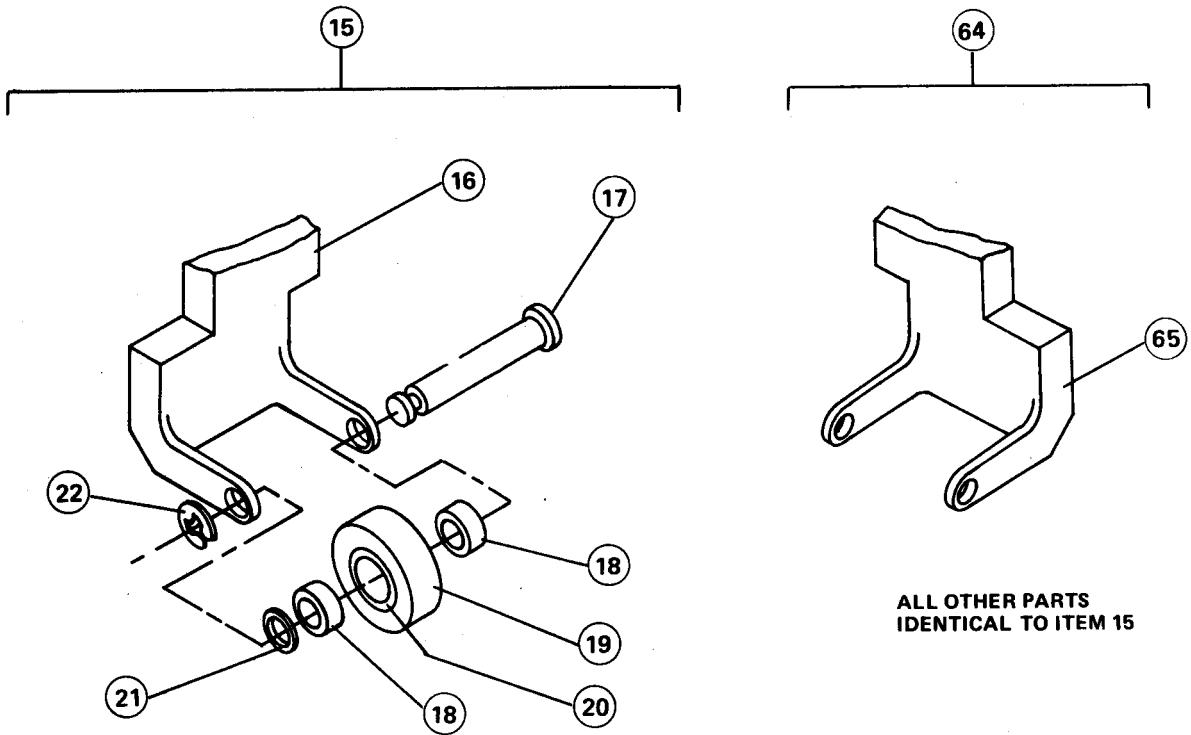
Slide plate subassembly (sheet 2 of 2)
